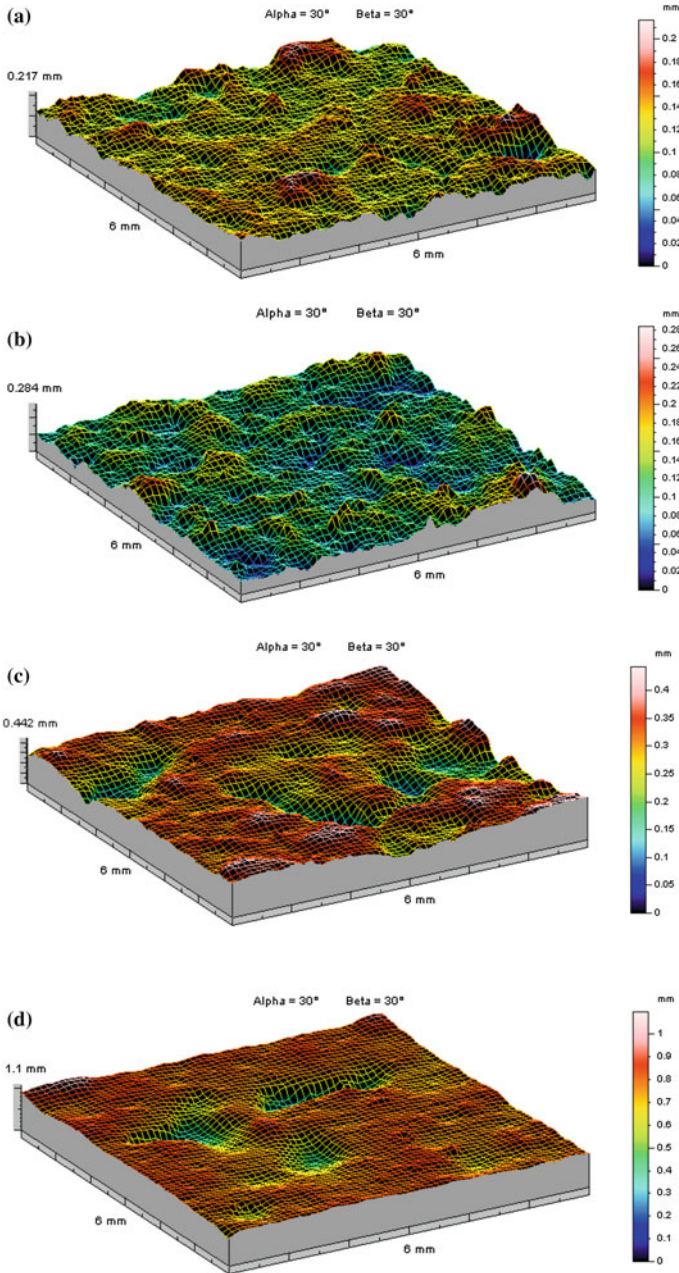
Three-dimensional images (3D) of the surface of the samples of the casting cast in the mold from molding sand a sand 1, b sand 2, c sand 3, d sand 4
